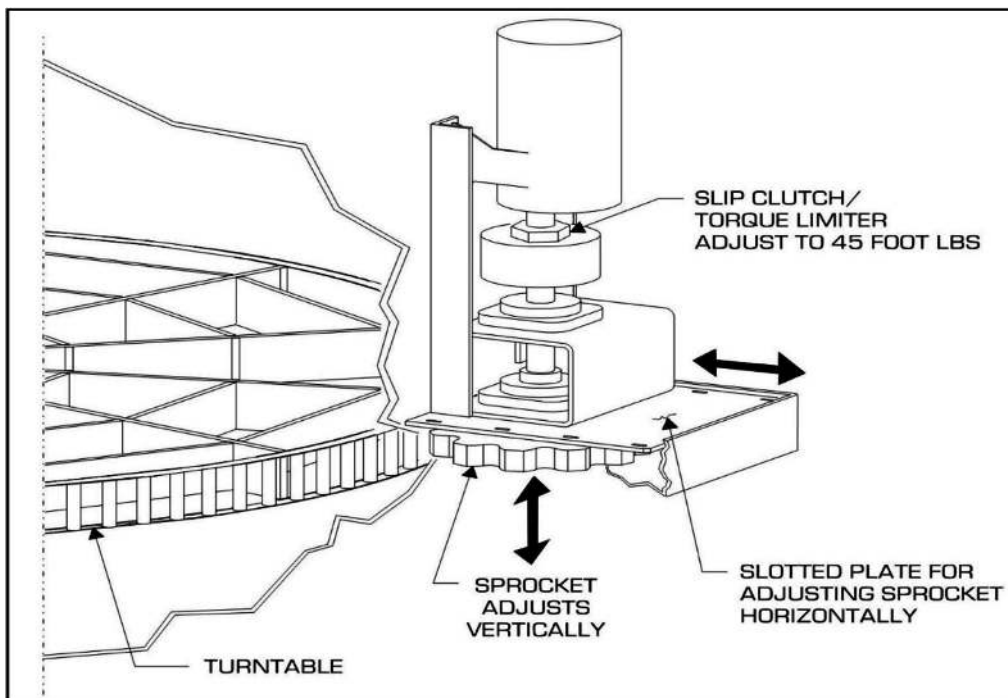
10: Turntable Drive and Turntable: Slip Clutch/Torque Limiter
